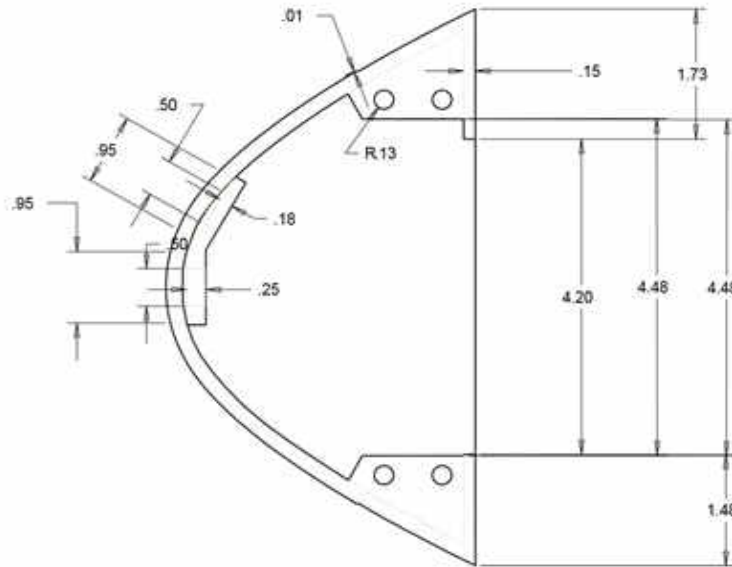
0.1016 meter cylindrical leading edge tip design.
